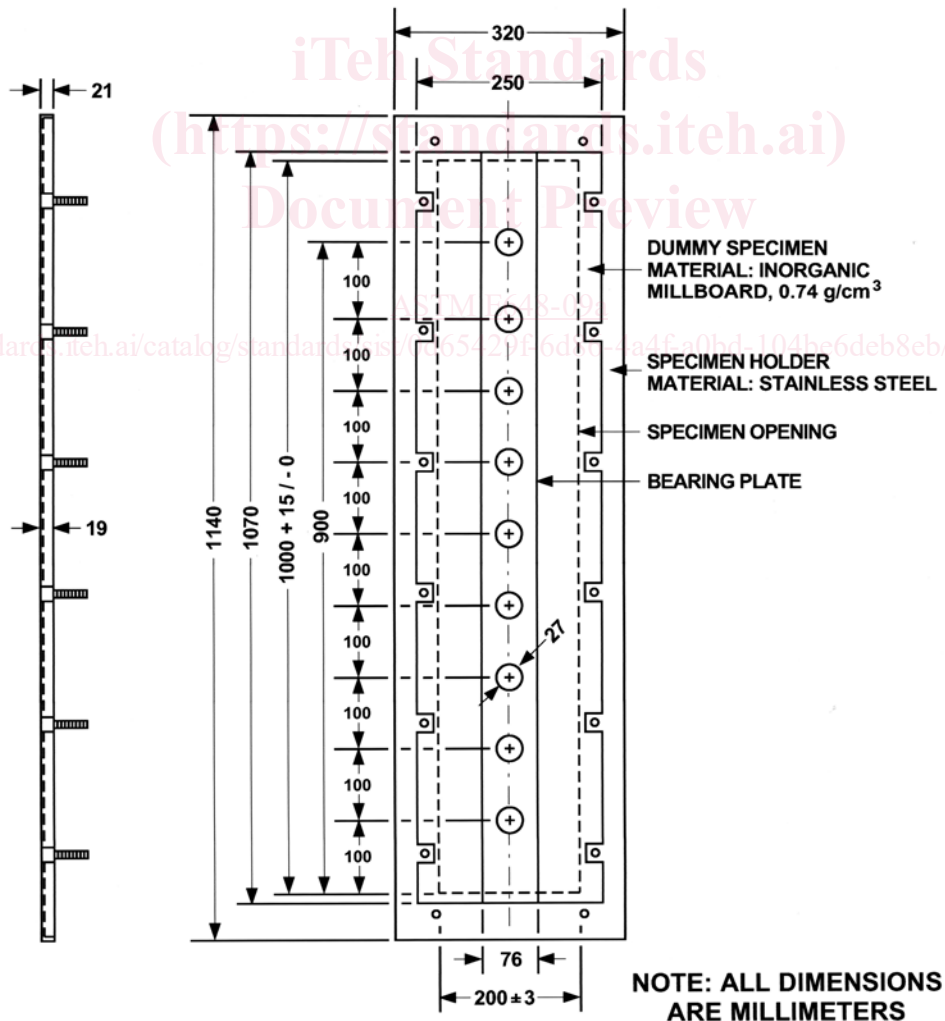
Dummy Specimen in Specimen Holder (Bottom View)
